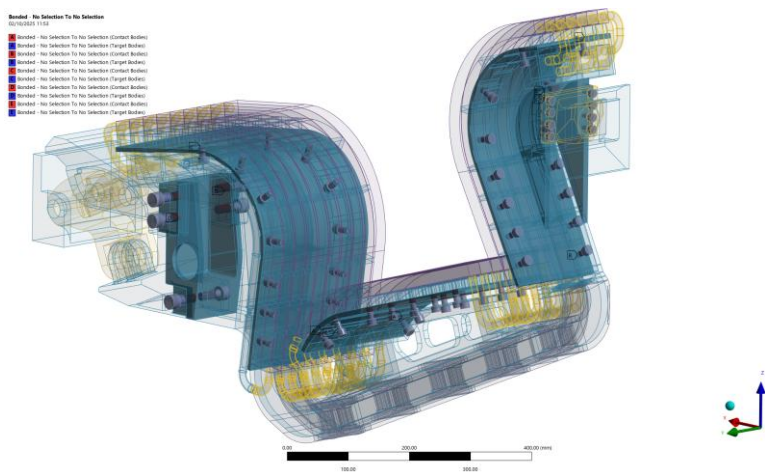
Bonded connections between bolts thread and back plates threaded holes
